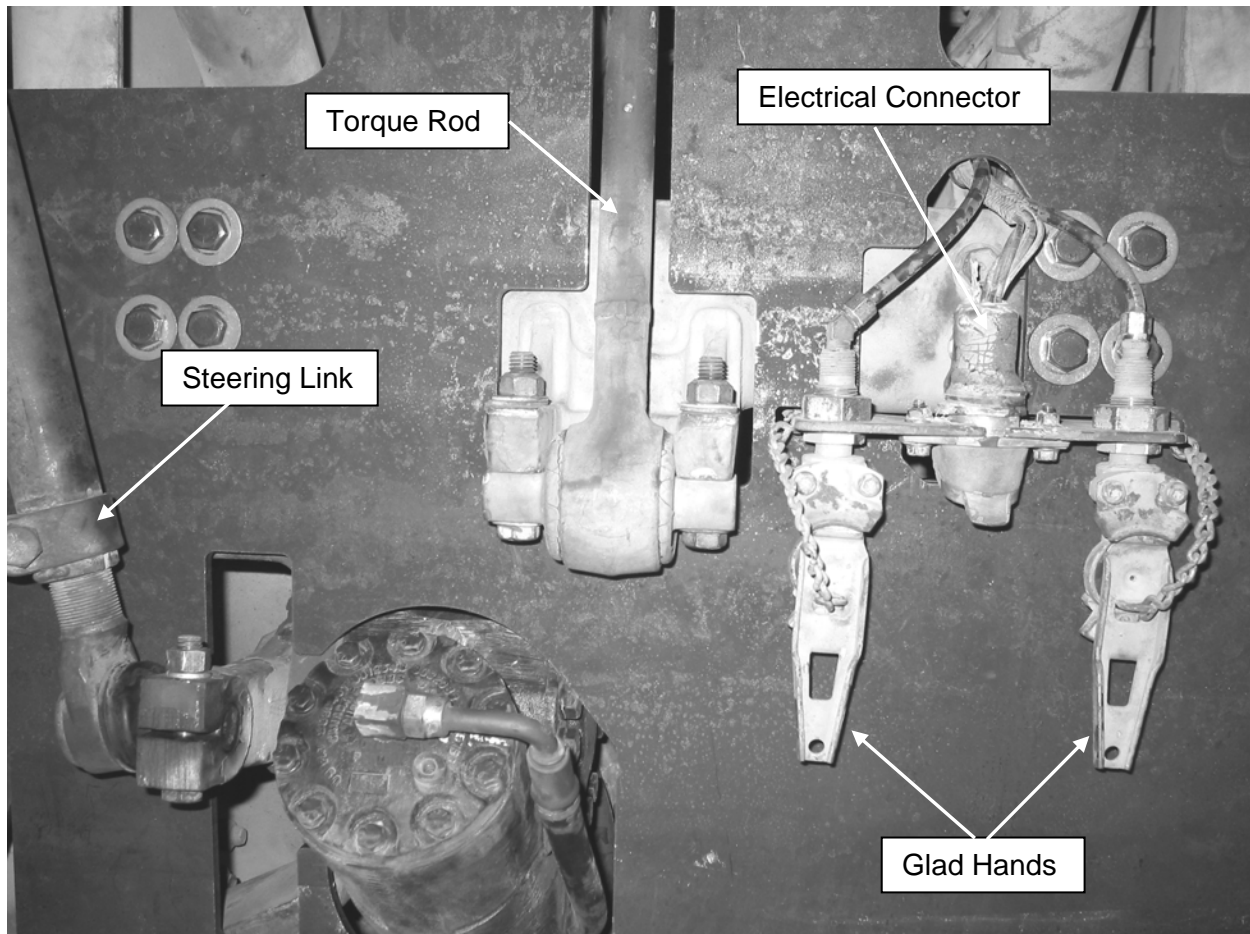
Steering Link, Torque Rod, Glad Hands, and Electrical Connector re-installed.
